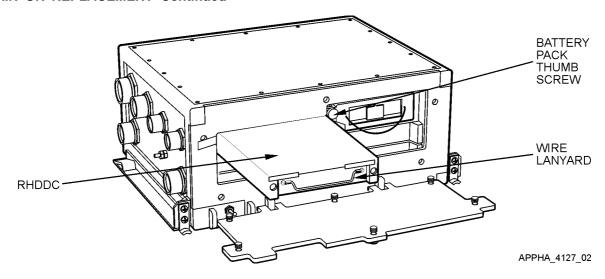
Remove/Replace Battery Carrier Assembly P/N 59727–1 For PU NSN 7021–01–475–0217/NSN 7021–01–487–0579
